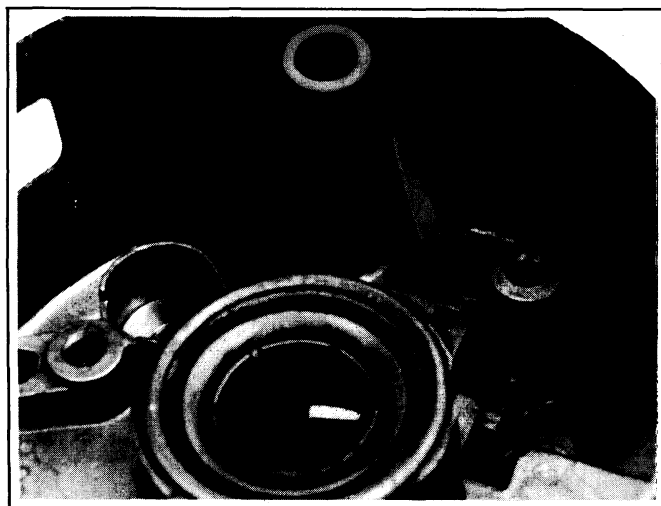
B-107--Rack Preload Spring Removal - Corvette
